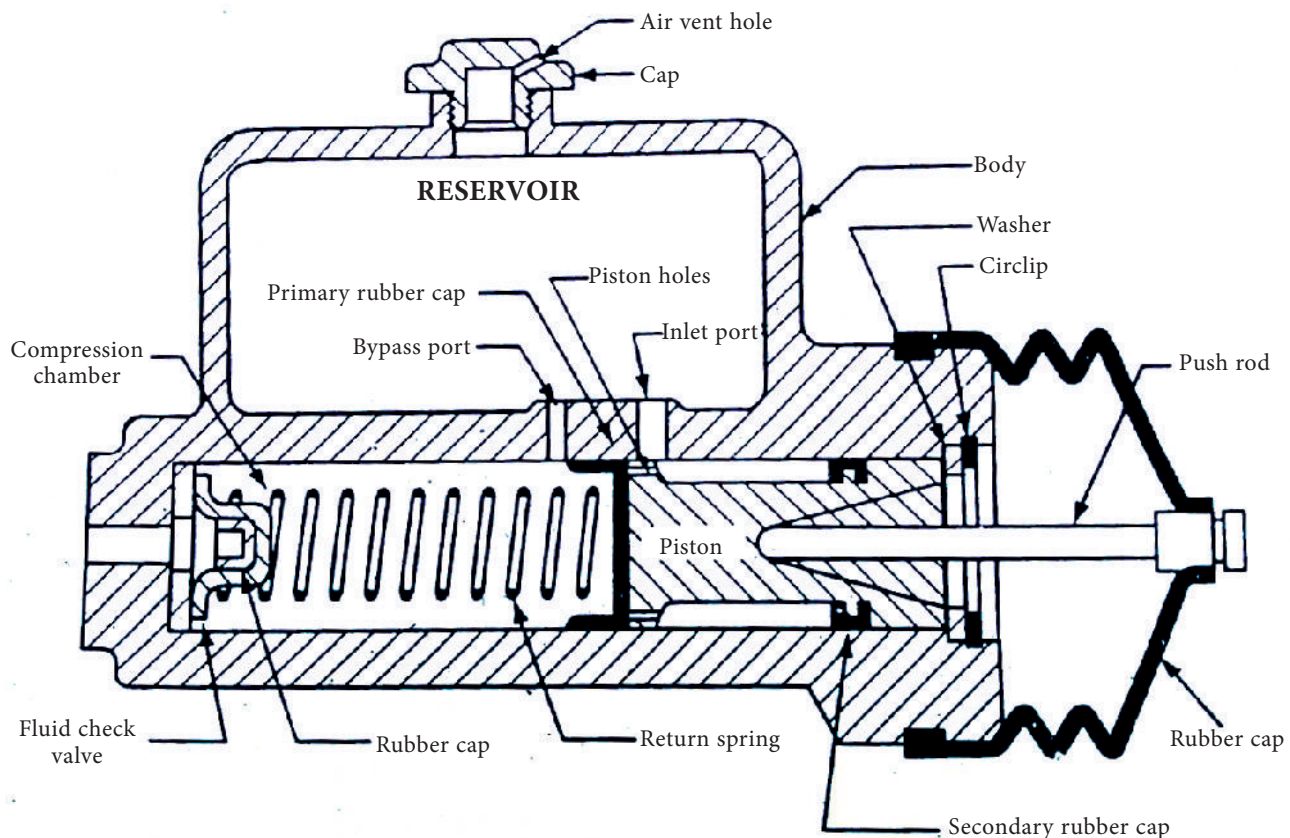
(a) Sectional view of a master cylinder
